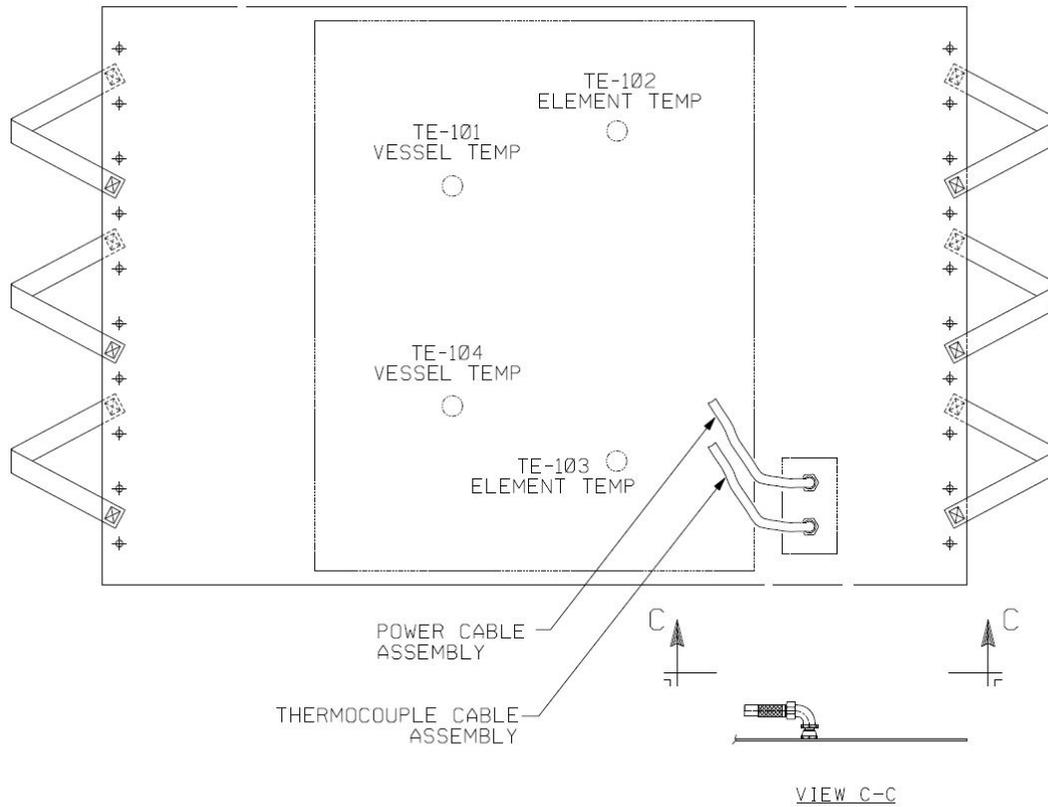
Basic layout of Versum Materials Gen II heater blanket
